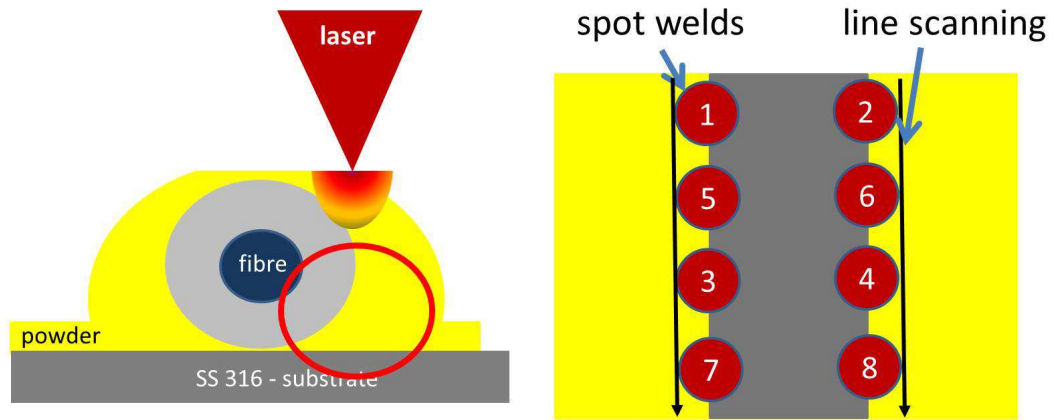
Left: Schematic illustration for applying powder with a shaped blade in vicinity of the coated optical fibre. Right: Illustration for the applied pattern of spot welds and line scanning that is used to weld the fibre to the substrate.
